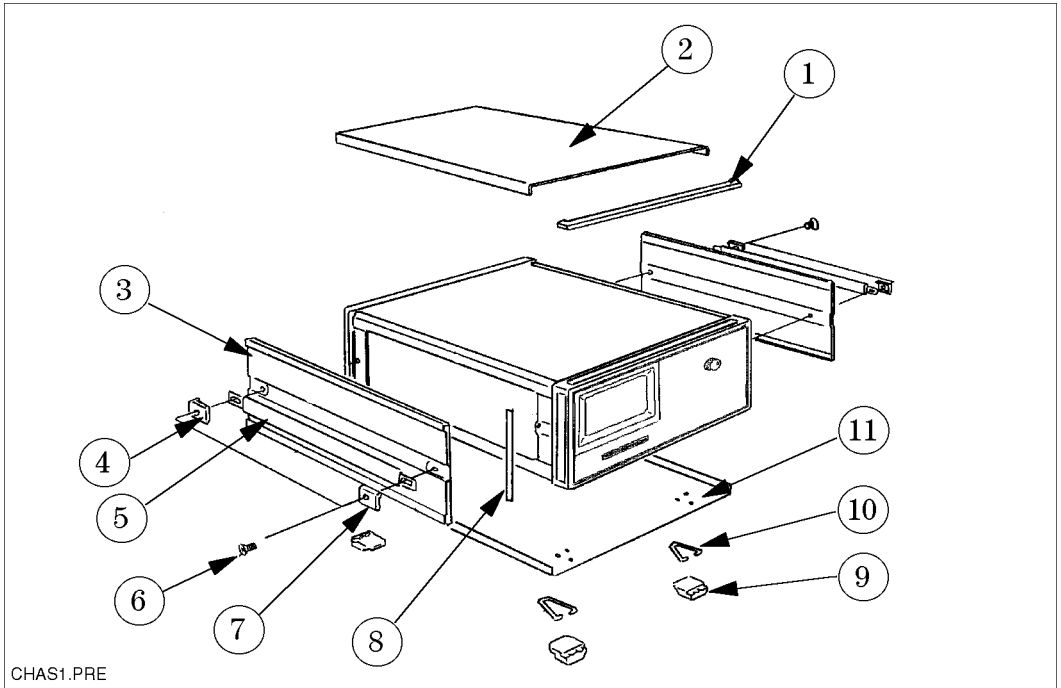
HP 4155B/4156B Chassis Parts Location (1 of 2)
